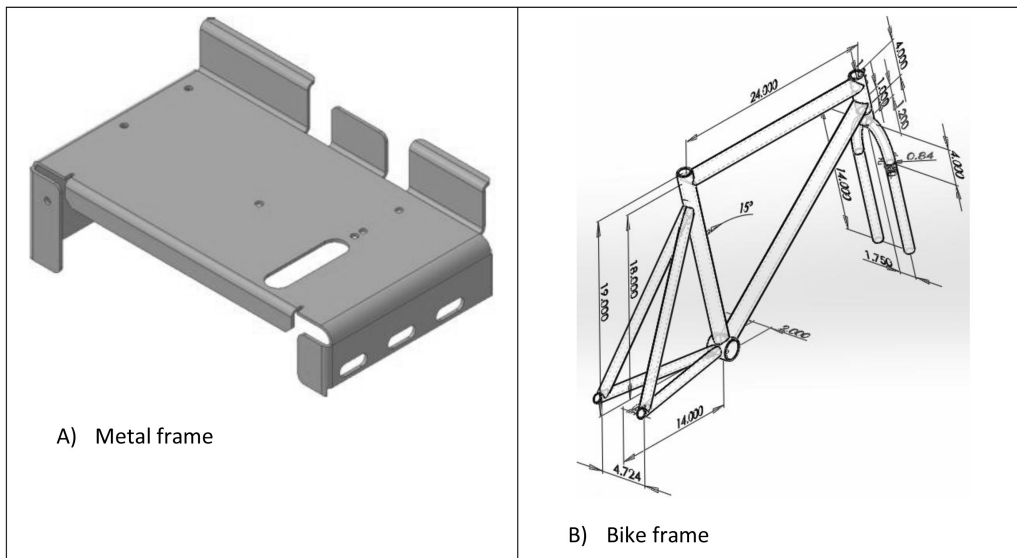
Sheet metal and weldment CAD parts.
